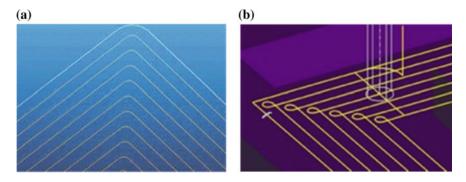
a Rounded tool paths, b looped tool path at corners [22]
